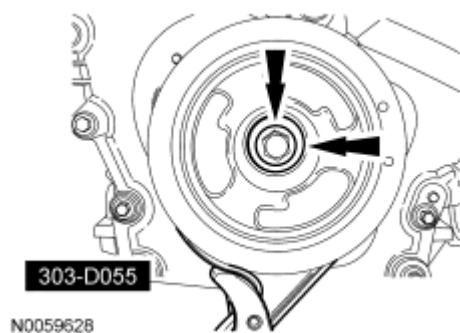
Removing Crankshaft Bolt & Washer Using Special Tool (303-D055)
